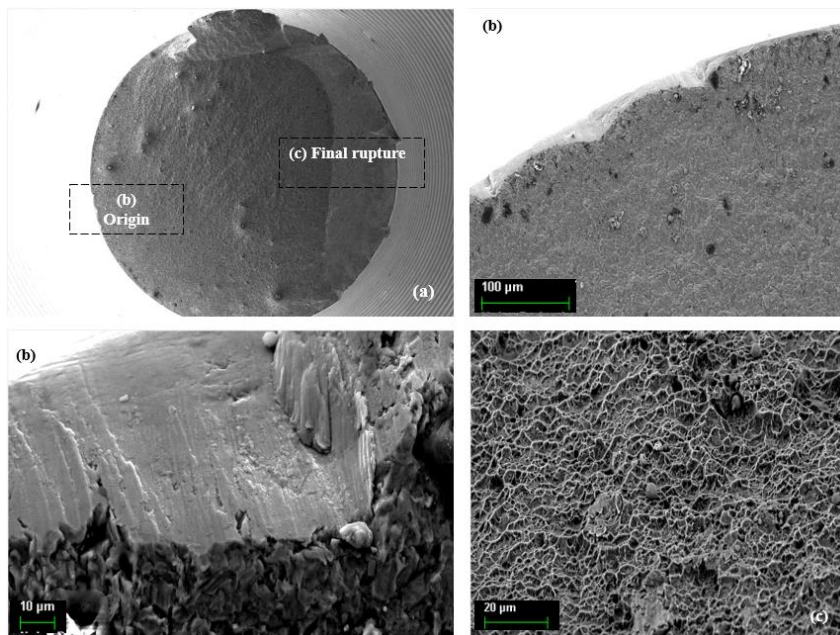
Fracture surfaces of THPed specimen, (a) General morphology of failure. (b) crack initiation site at higher magnification (c) the dimpled morphology at final rupture.
